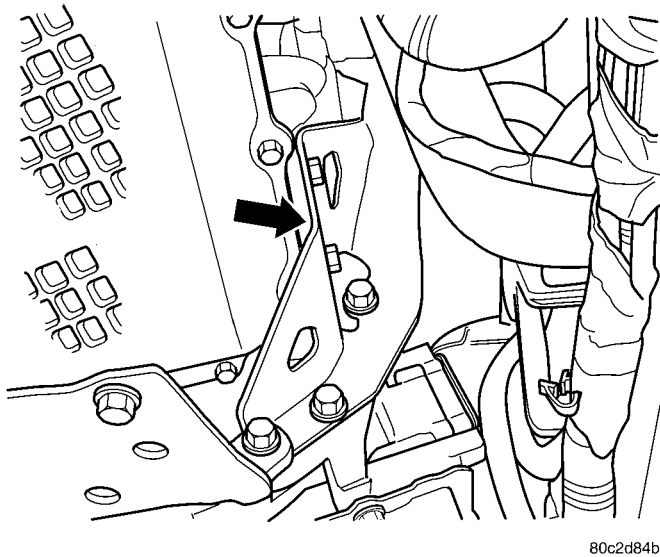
INTAKE SUPPORT BRACKET LOWER BOLTS
